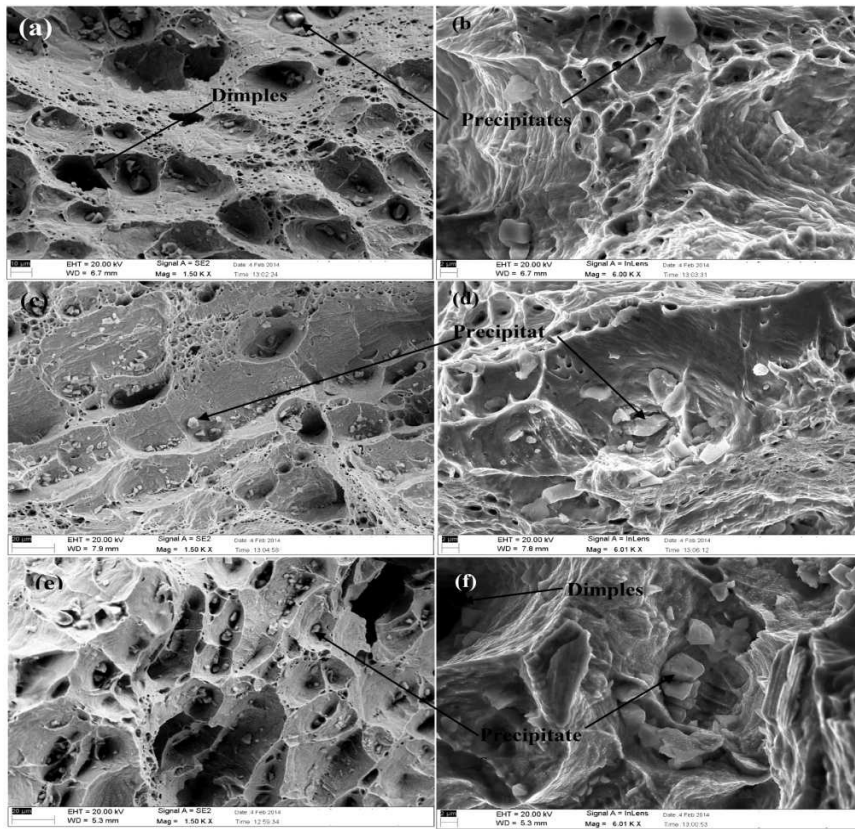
Fractograph of the dissimilar SMA welded Copper and Stainless steel 304 using different filler material at two magnifications, (a,b) ENiCrMo3, (c,d) ENiCu7 and (e,f) E316L
